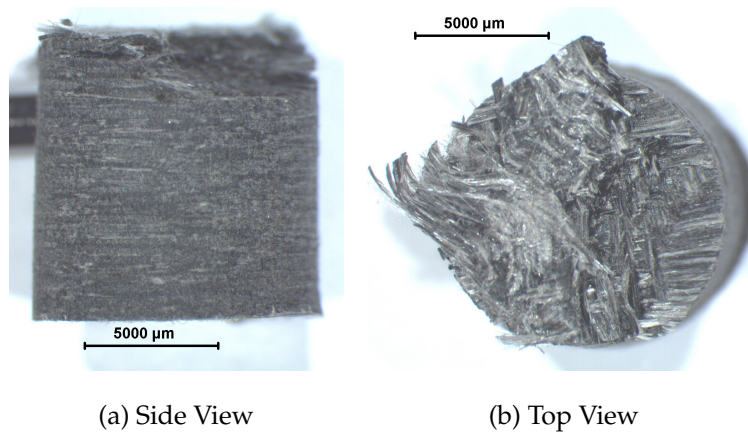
CHS 1.0 mm/min , Specimen 3: Fragment ejected on top right, possibly macroscopic shear
